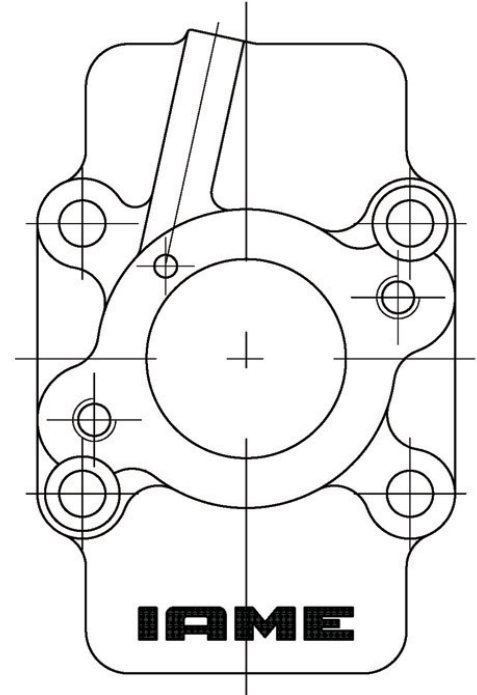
PHOTO IDENTIFICATION CARBURETTOR INLET CONVEYOR
